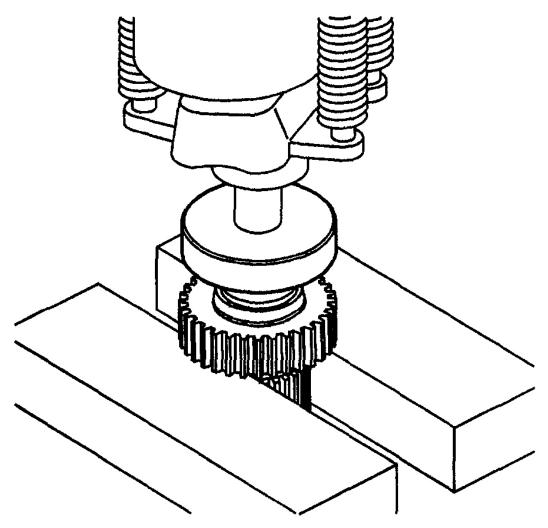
Removing Driven Gear & Retaining Ring From Front Output Shaft
